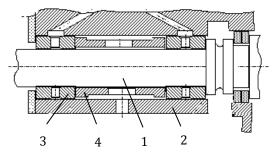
Bearing with rotating rings: 1 – rotor, 2 – hull, 3 – rotating rings, 4 – stopper ring.
